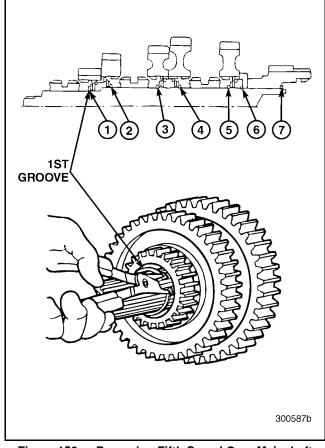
Removing Fifth Speed Gear Mainshaft Snap Ring
